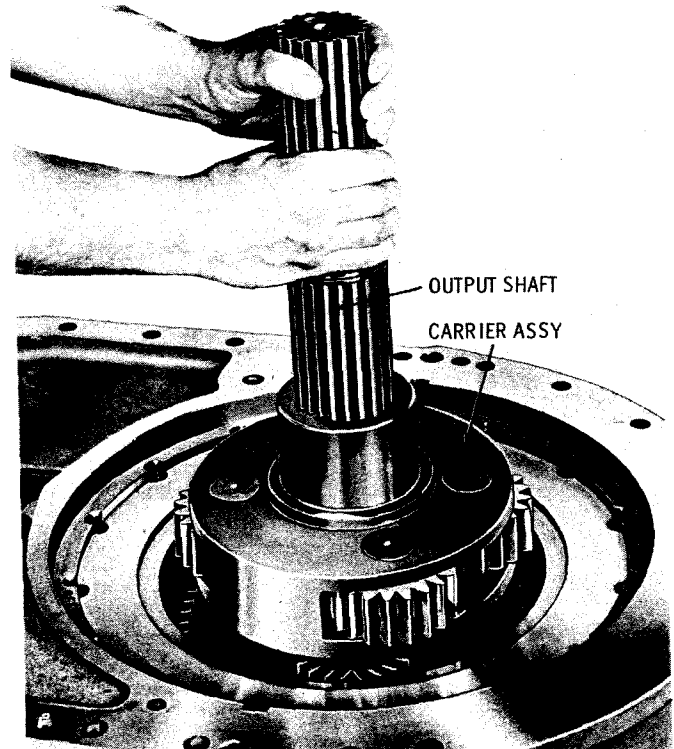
Removing output shaft and low-range planetary carrier assembly
